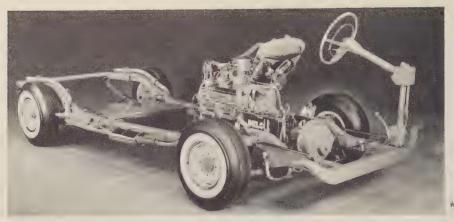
An experimental chassis for L'Universelle "dream truck" was designed and constructed by the GMC Truck and Coach Division. This chassis embodied the principles conceived by the Styling Staff and developed by the Engineering Staff.
